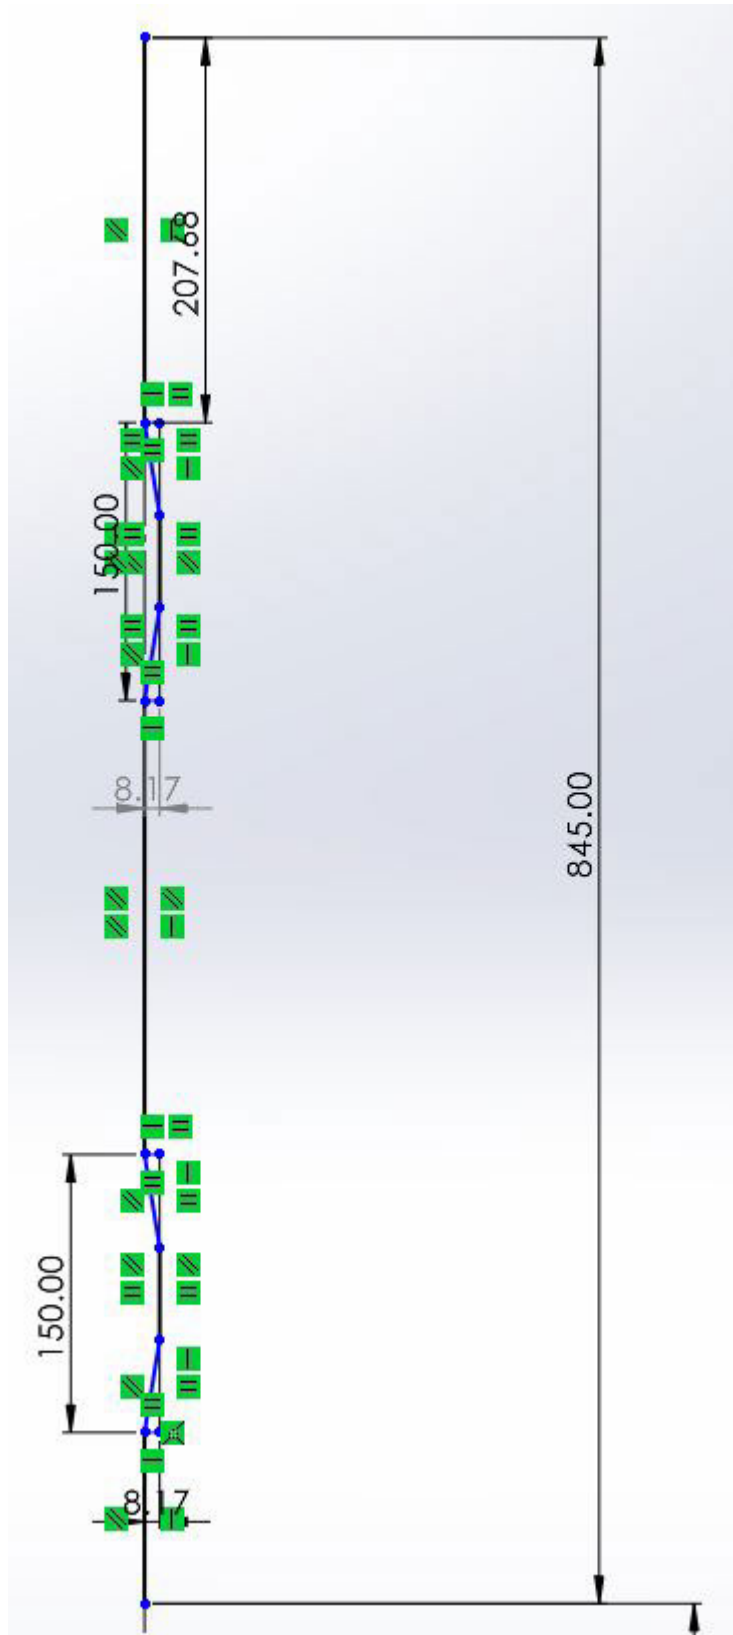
The dimensions one sheet section of the larger ribbed wall corrugation.
